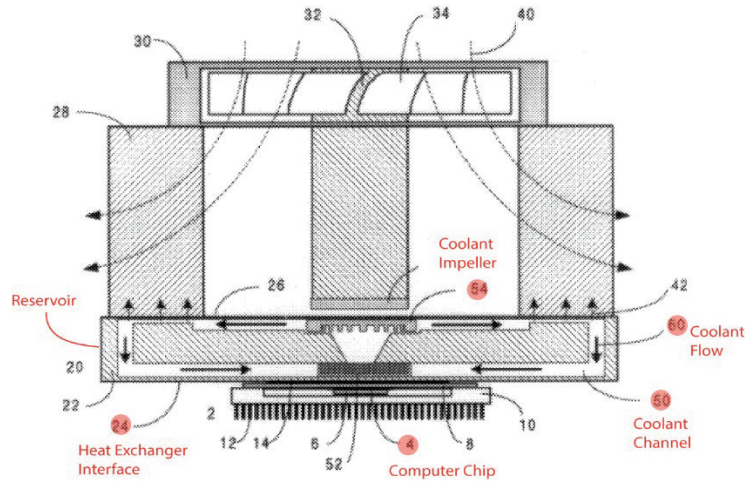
shows an assembly of a heat sink containing an active spreader plate. A heat source (2) is attached to the bottom sheet (202) of the active spreader plate assembly 25 through a compliant insulating layer (14). If the heat source
